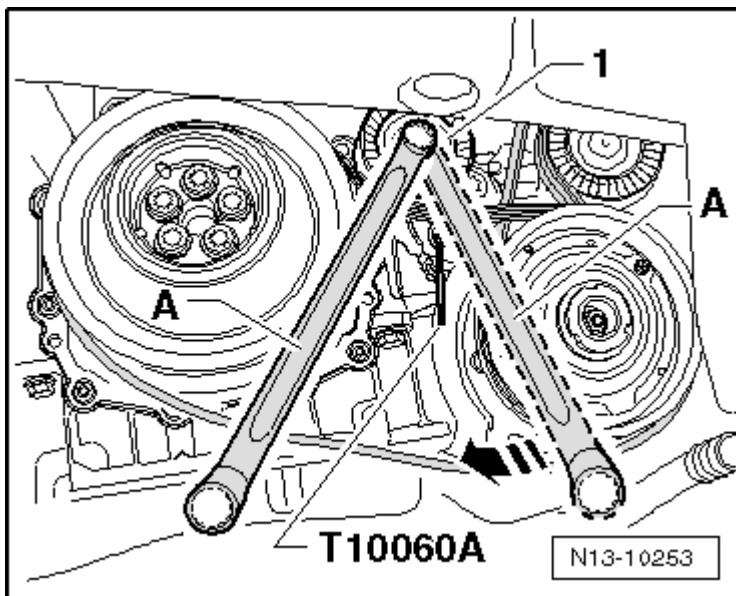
Swiveling Tensioning Element Using Open End Wrench And Securing Using Locking Pin T10060A
